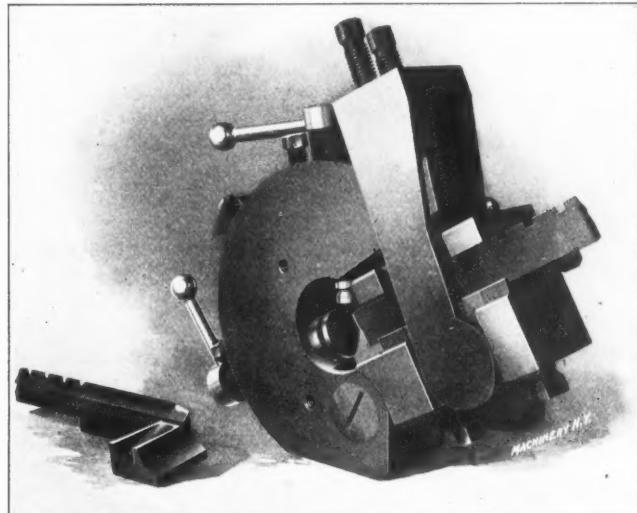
The No-clearance Turning Tool for the Flat Turret Lathe.
